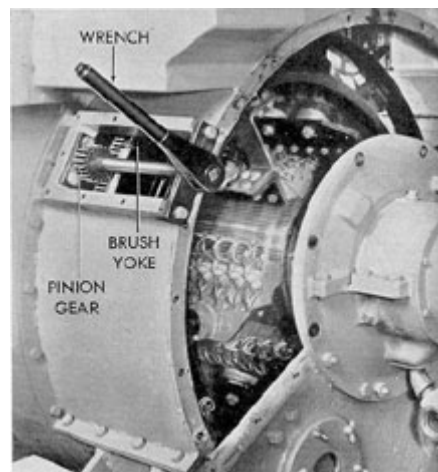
Wrench and pinion gear installed for rotating G.E. main motor brush rigging.
